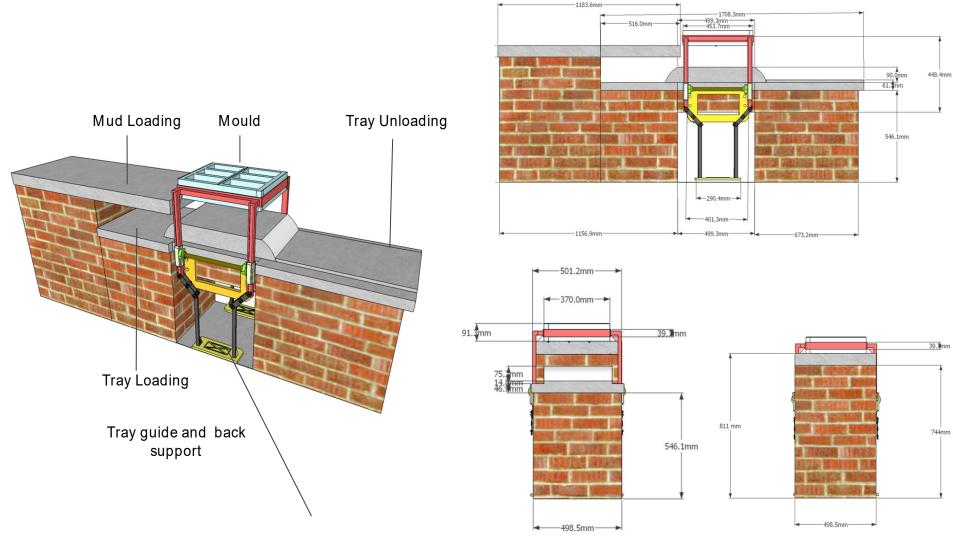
(Engineering Drawing For the Fixed Brick type brick moulding machine)
